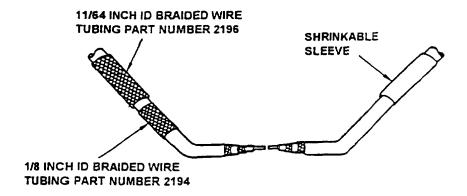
Triax Cable Solder Repair (Sheet 1 of 5)
